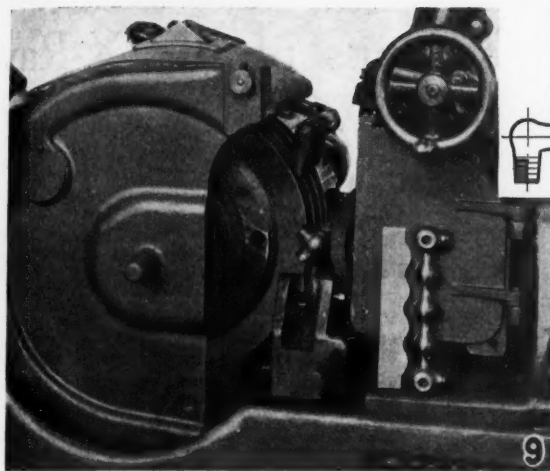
150 faucet pipes per hour are finished with this equipment. The grinding wheel is trued to shape by means of a diamond that is controlled by a cam which is formed to the shape of the work. Fig. 10 — Cross-section drawing showing relation of work and wheels.
